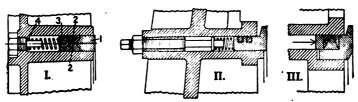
Detail of Relief-rings for Marine-engine Valves.
